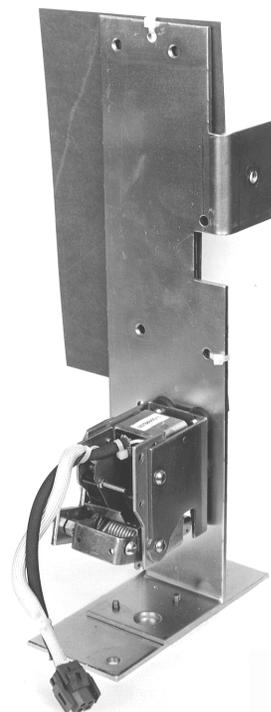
Trip unit and flux shifter mounting bracket assembly.
